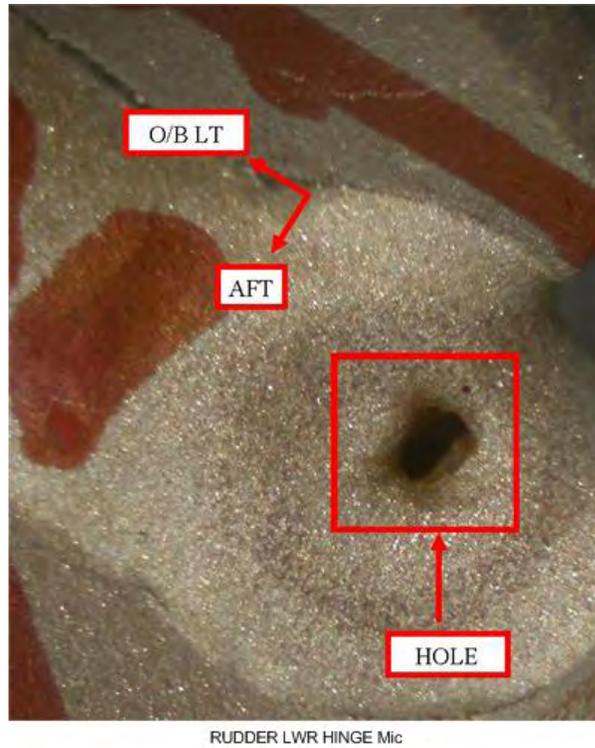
Macroscopic View of Hole in the Weld Bead on the Rudder Lower Hinge Assembly WL 51.75
